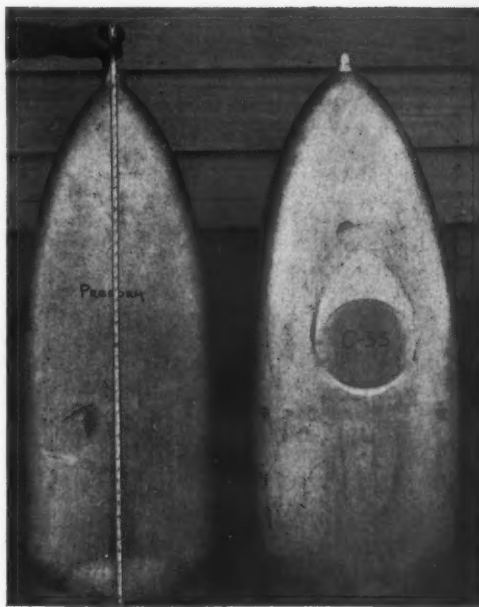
Aluminium missile pylon cover approximately 4 ft. high, which was sized by explosive in the die seen in Fig. 1
